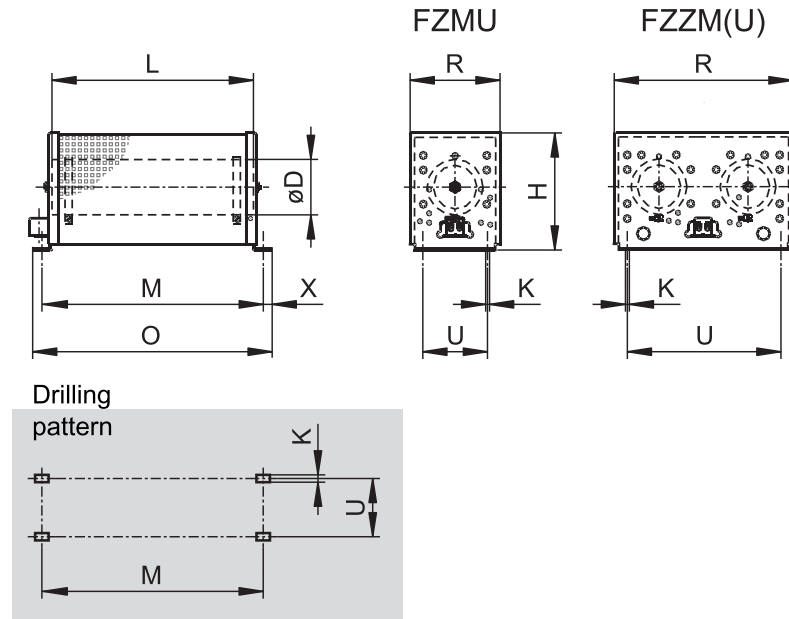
FZMU, FZZMU 400×65 dimensional drawing
